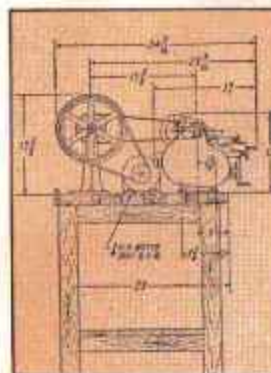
A Section of Blueprint for Plain Type Horizontal Countershaft Installation
